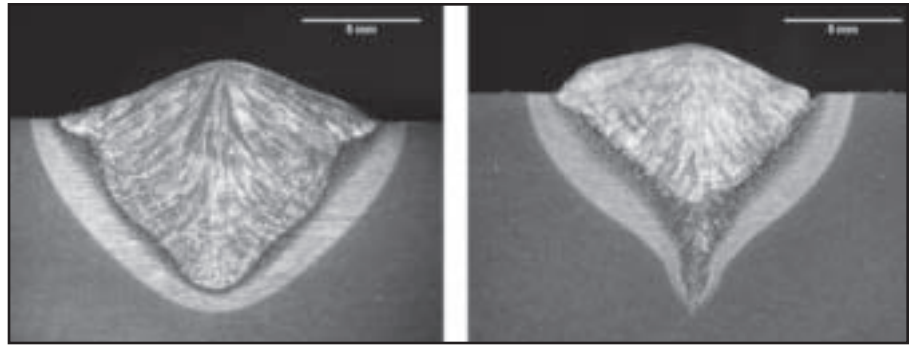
Left: pure hybrid weld with a uniform fusion zone; Right: hybrid weld with some laser-only penetration and nonuniform fusion zone.
